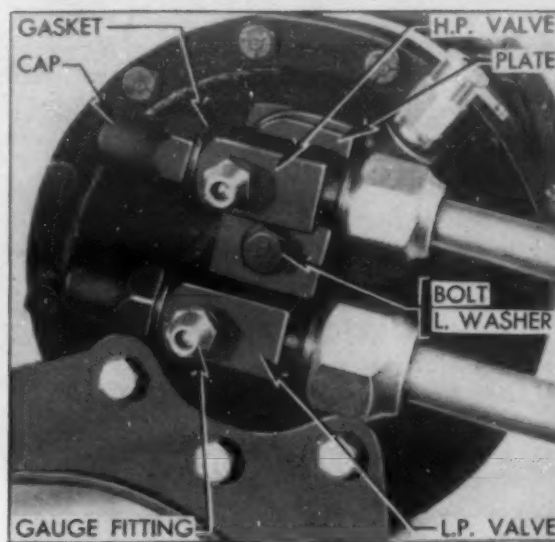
shows service valves of compressor on 1955 Buick air conditioner.
